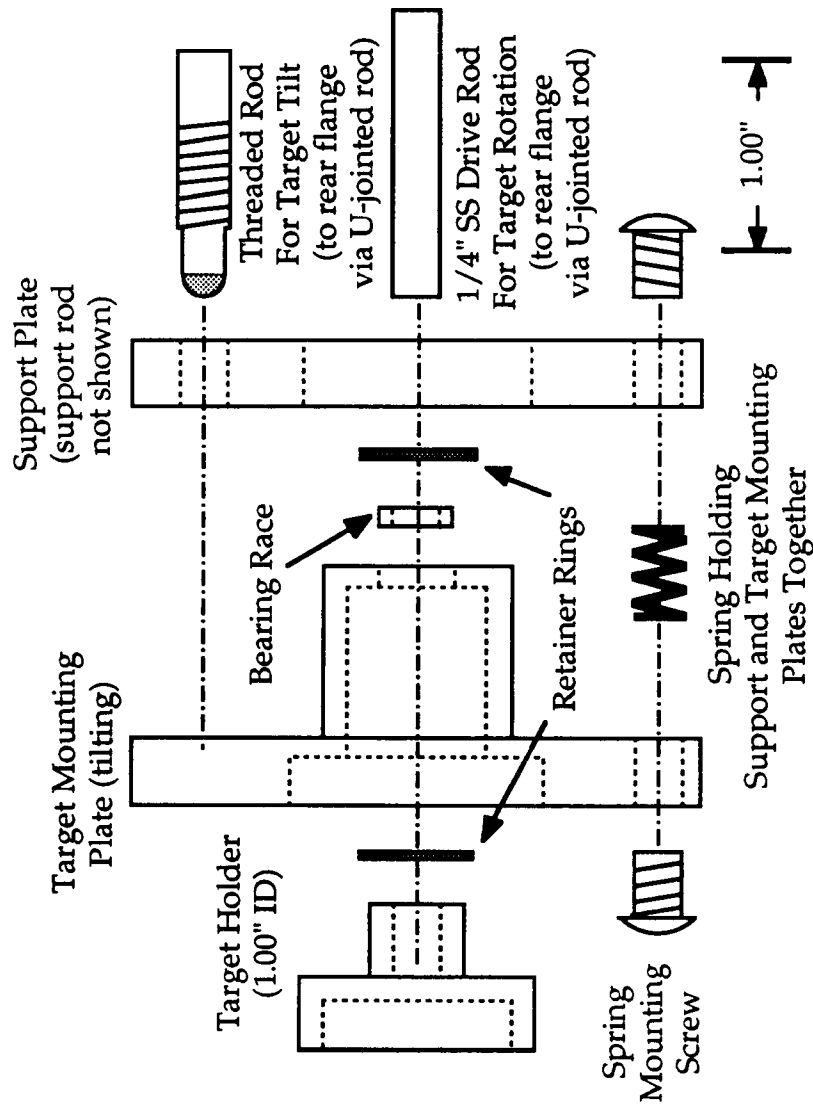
Single target holder for II-VI pulsed laser ablation chamber. Mounting plate assembly constructed from modified optical mount, Newport model number MM-2A-VC.
